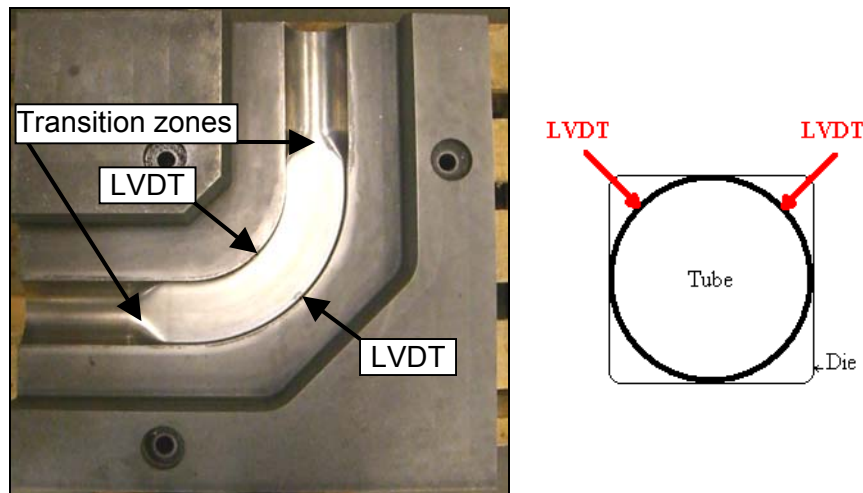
Pre-bent tube hydroforming die and schematic of LVDT location
